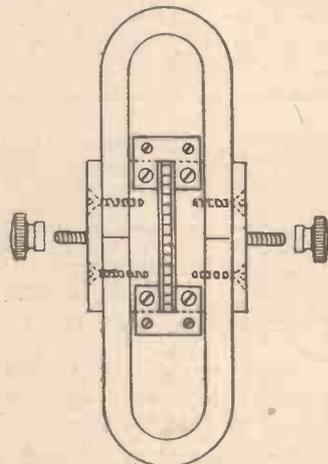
Front view of the magnets and pole-pieces assembly for the ribbon microphone described in the text and illustrated on our cover.
